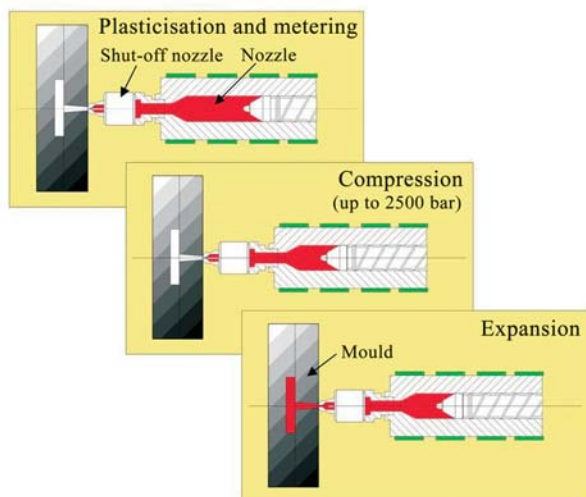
Processing steps for the expansion injection moulding¹¹
